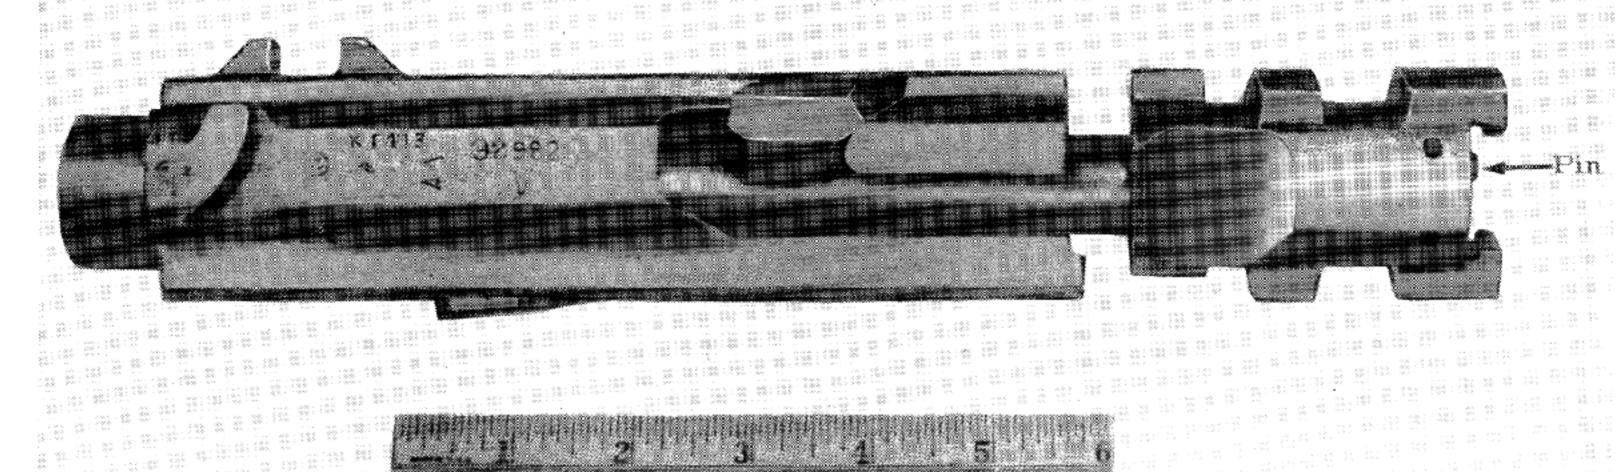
Bolt assembly for 23-mm NS Gun.
